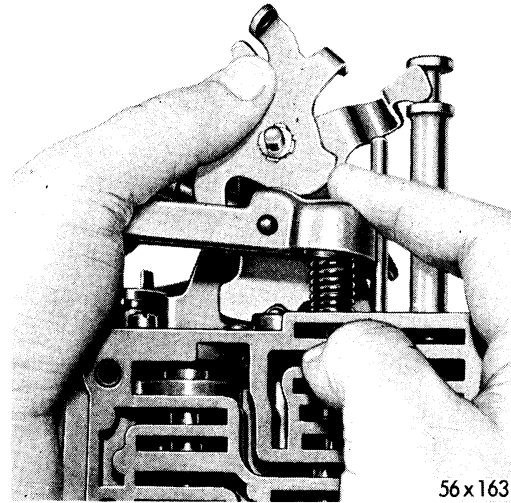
Indexing Throttle Camshaft with Throttle Operating Lever
